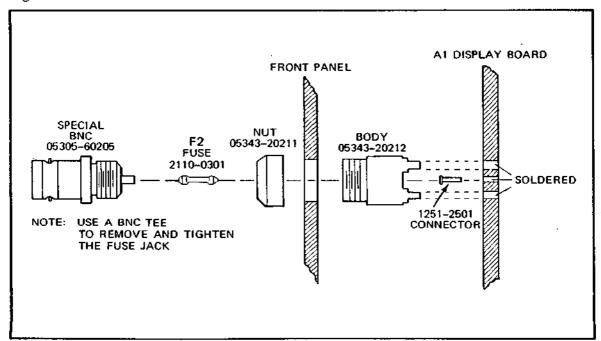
Details of Input Connector A1J2 and Fuse F2 Mounting
